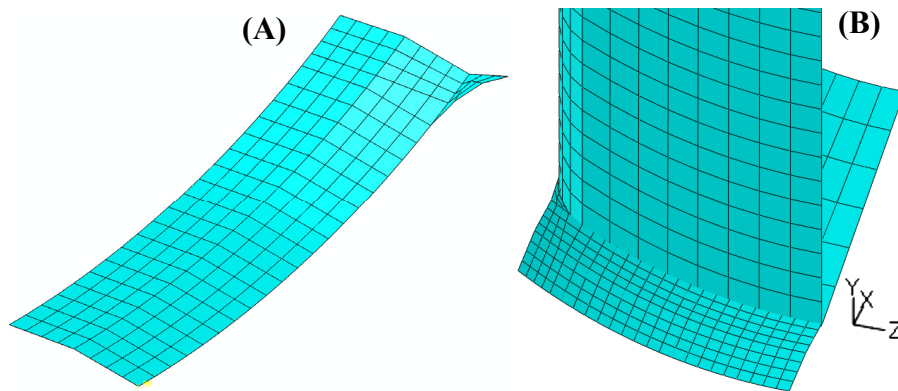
Chip guide (A) and how it mates to the cutting tool (B)
